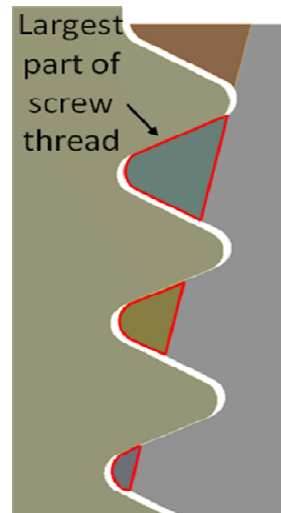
The largest part of the screw thread(4143X-Cr-Mo)
